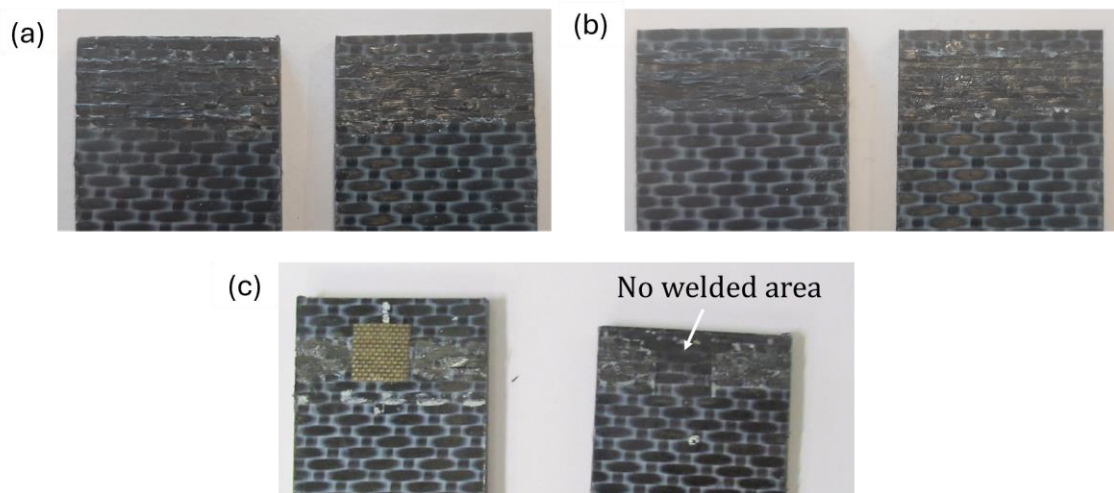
Fracture surfaces of representative specimens from (a) Set-Up 1, (b) Set-Up 2, and (c) Set-Up 1-DEF batches.
